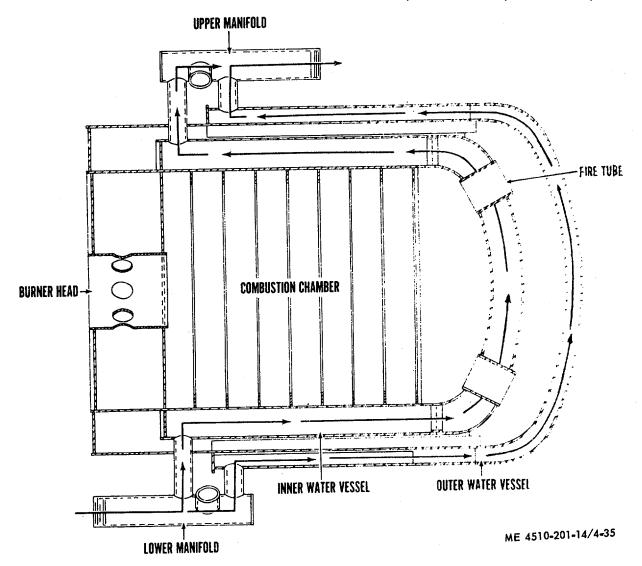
Schematic drawing showing inside of water heater tank. 4-43
